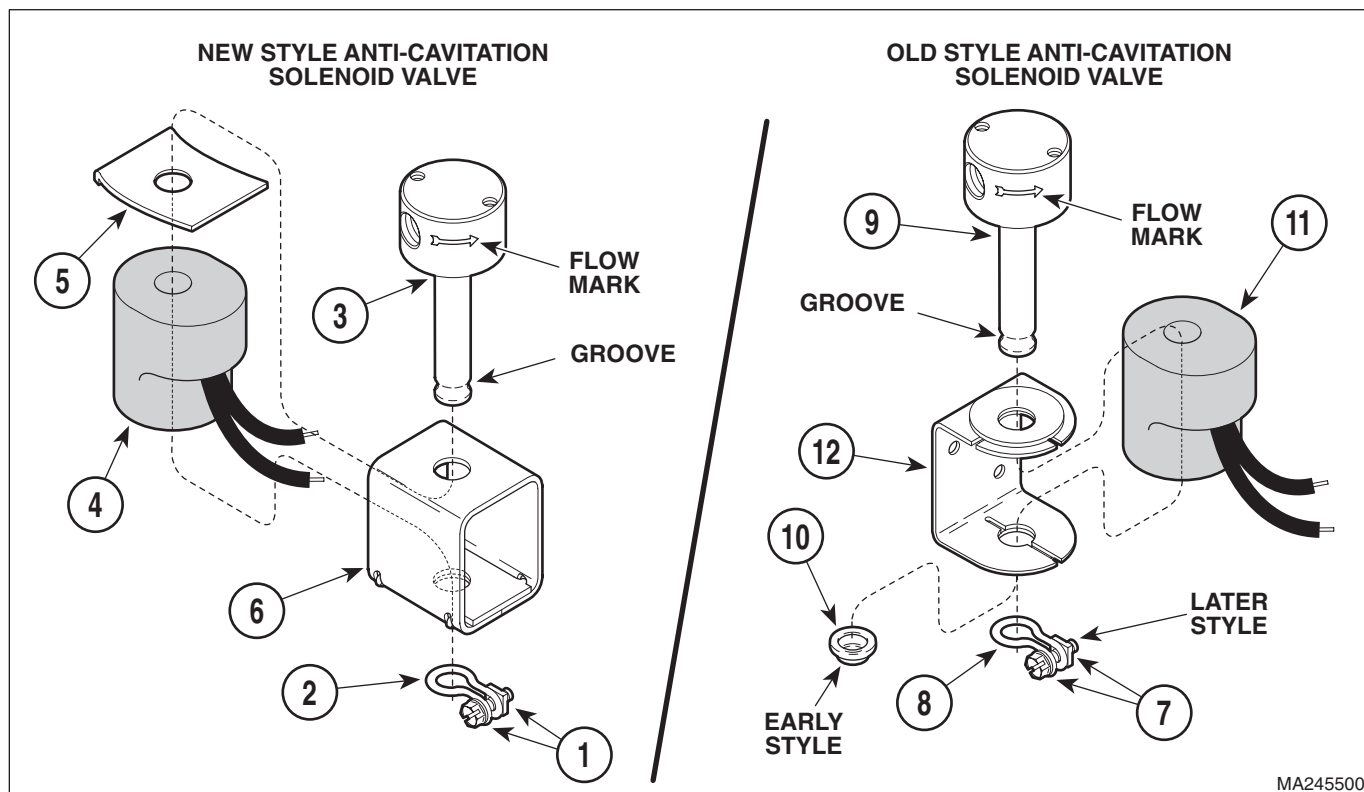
Old Style Ant-Cavitation Solenoid Valve Rebuild
